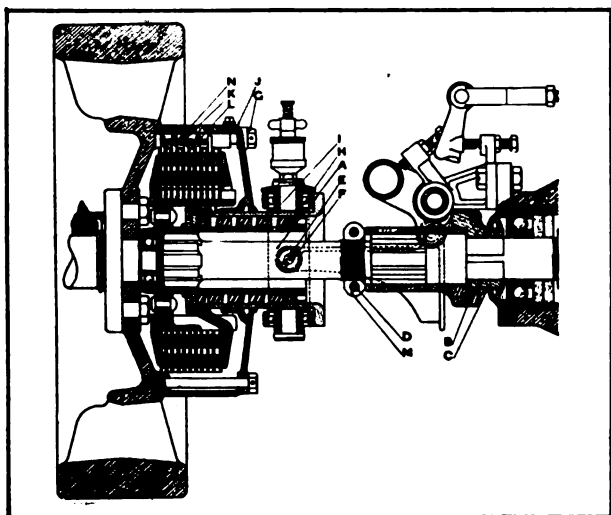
Sectional View of Clutch Assembly of Premier Car with Parts Used in Adjusting Lettered.
